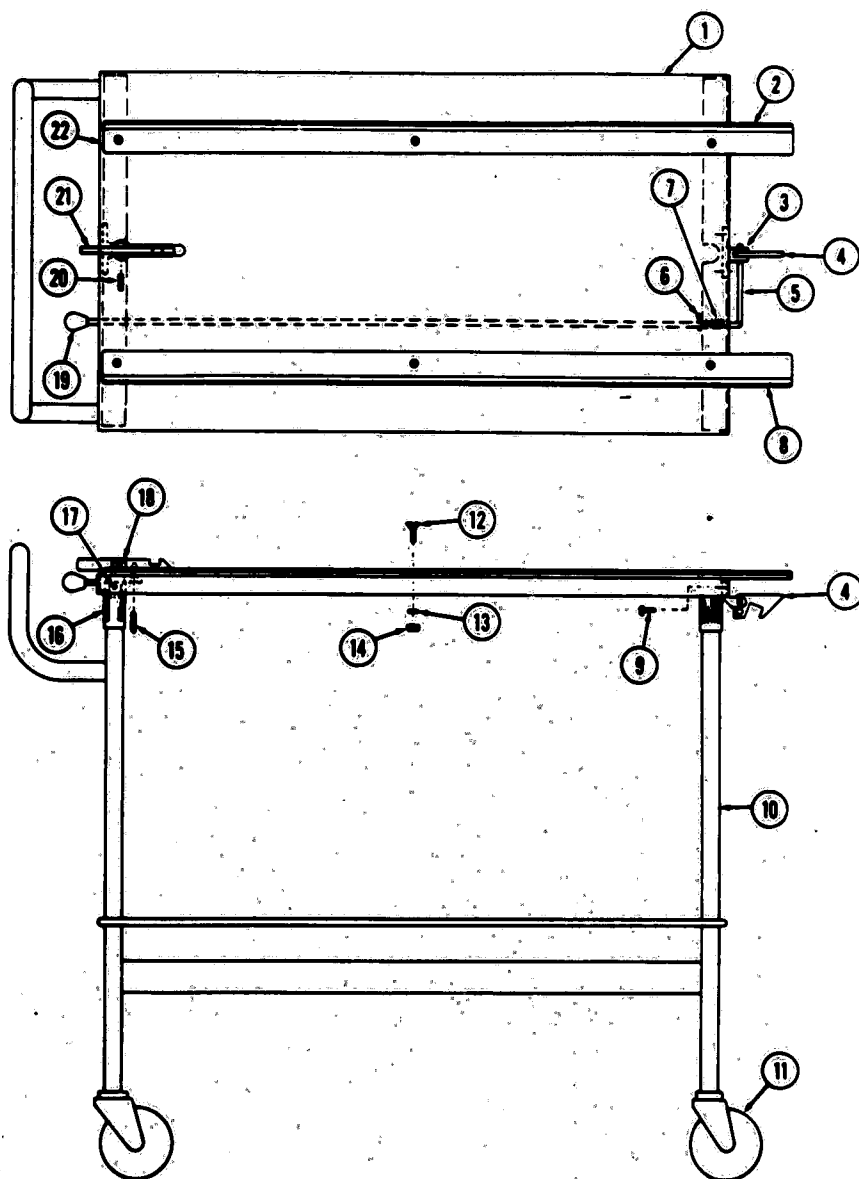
OPTIONAL TRANSFER CARRIAGE ASSEMBLY
